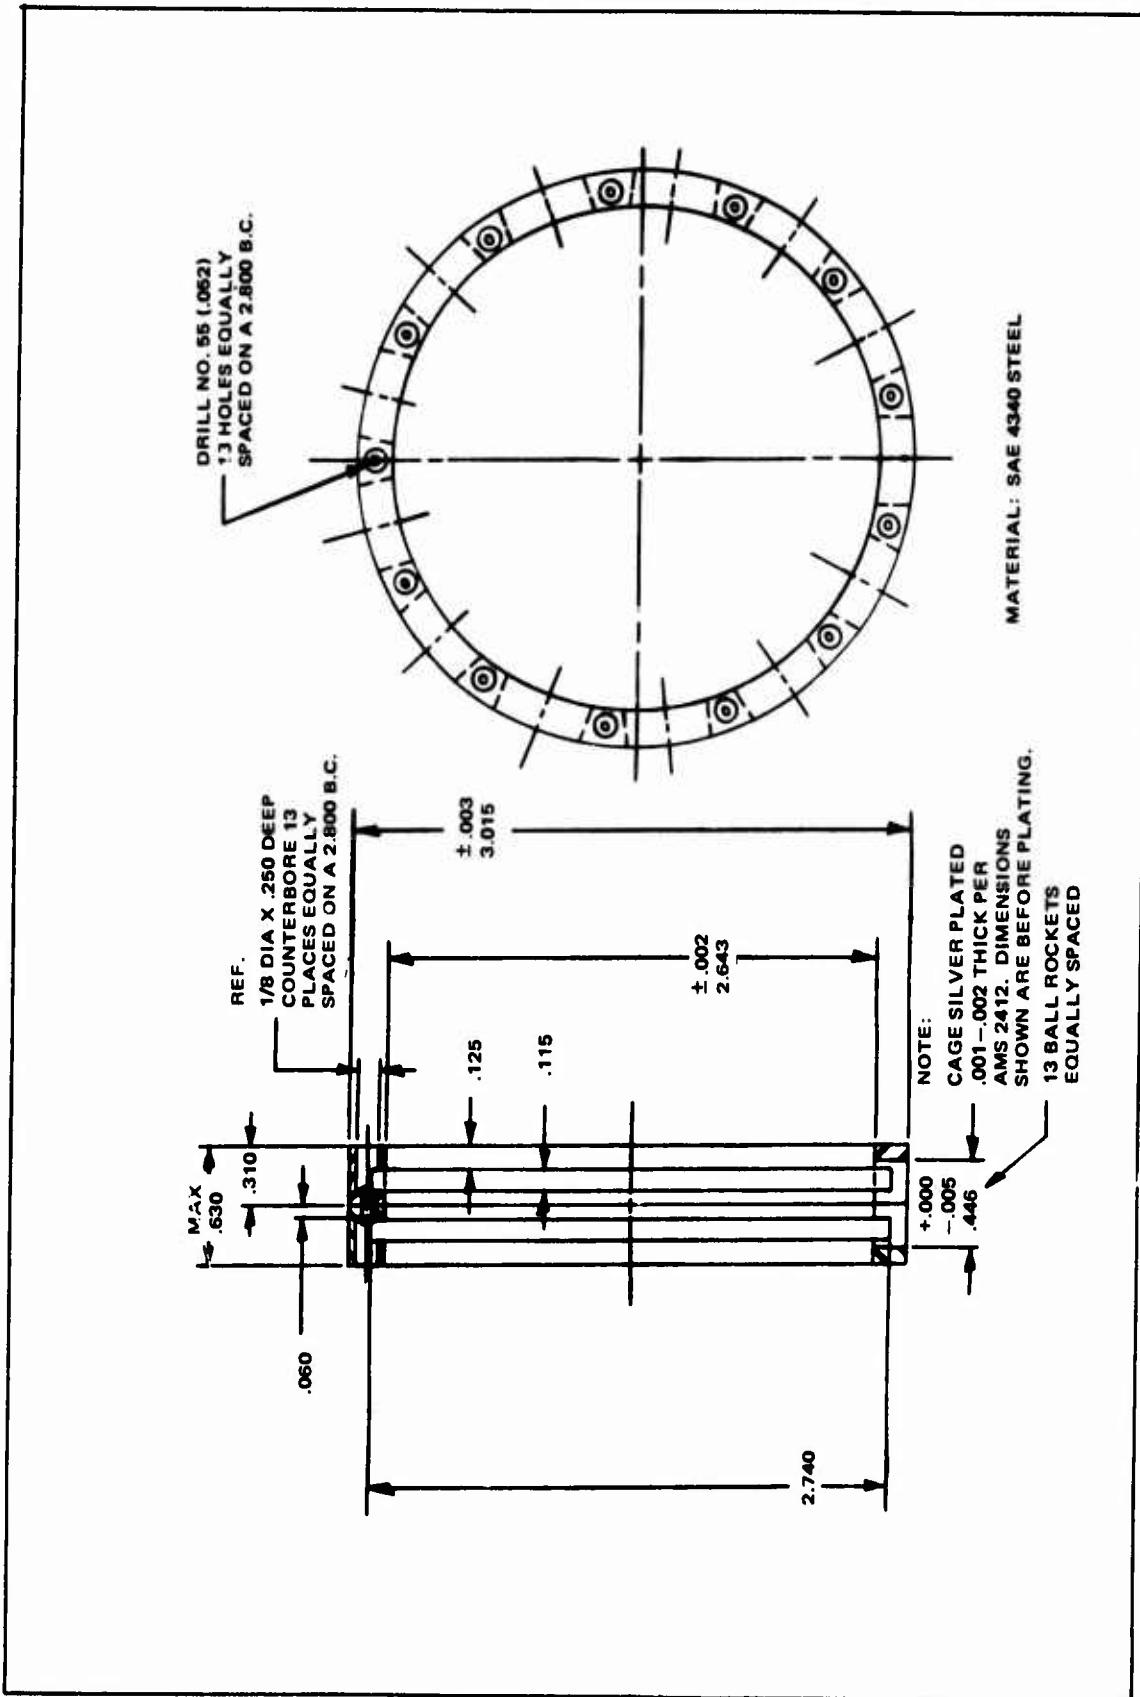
Two-Piece Machined Steel Cage, Silver Plated.
